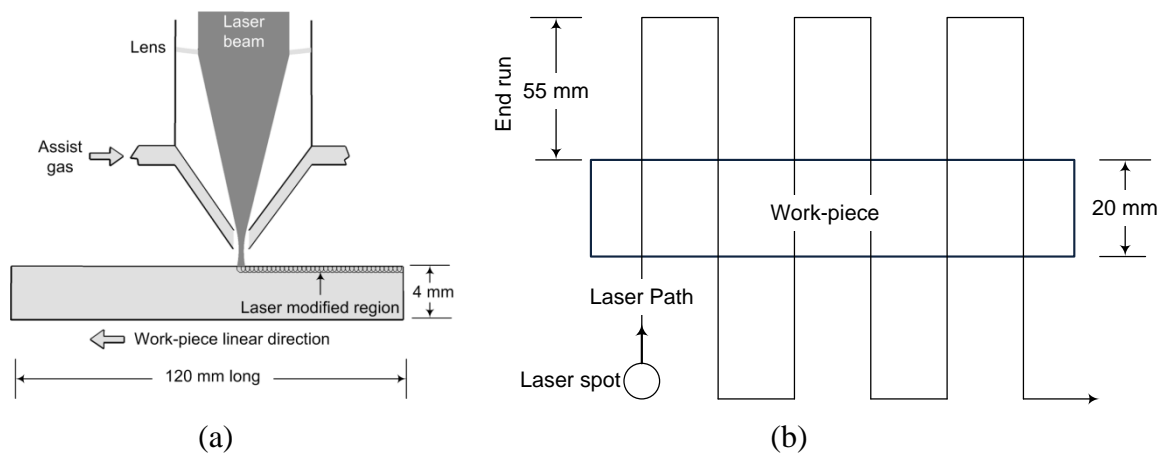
Schematic of the (a) cross sectional side view of the equipment and (b) the planar view of the raster scan path for the laser treatment process.
